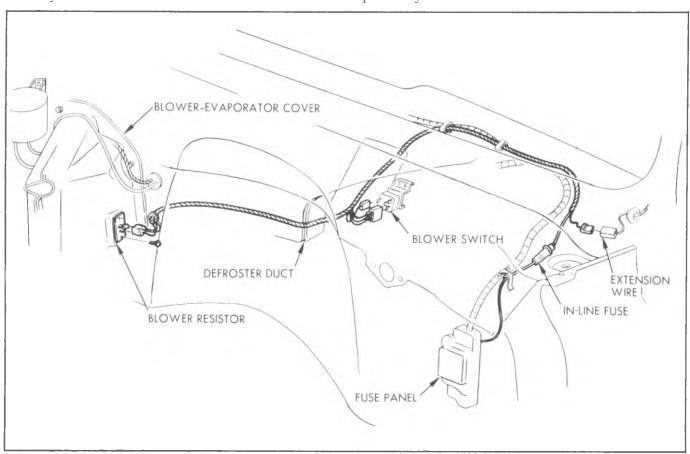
B-47-Overhead System Front Wiring (C-K Models)
